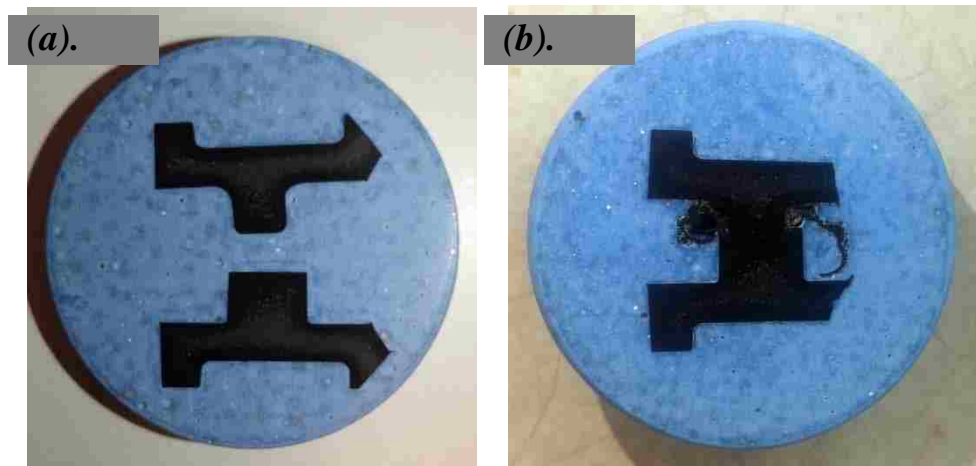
Cross-sectional view of (a) un-welded and (b) welded 4 mm and 6 mm beads samples prepared for microscopy investigation.
